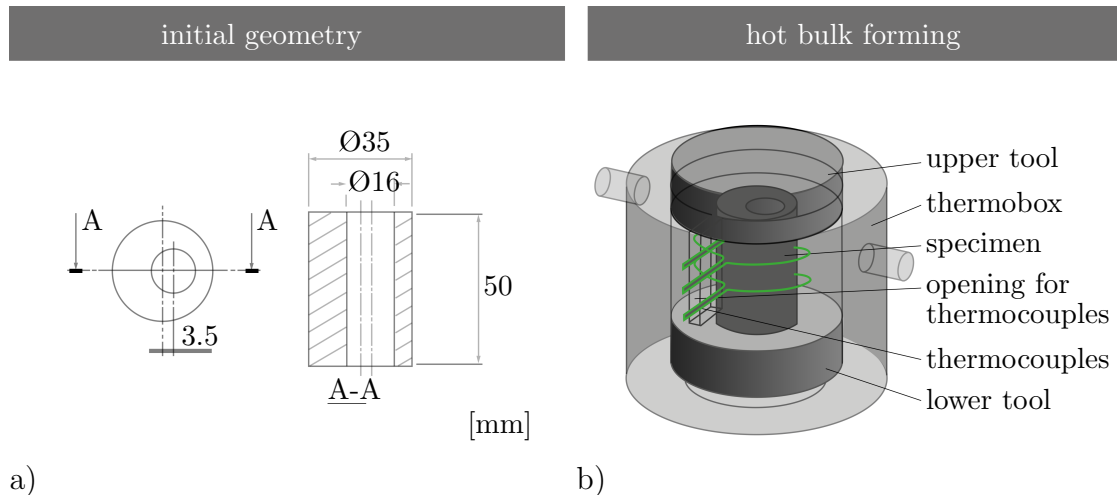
a) Dimension of the cylindrical specimen with eccentric hole and b) set-up of hot bulk forming process with thermobox, adapted from BEHRENS ET AL. [18].
